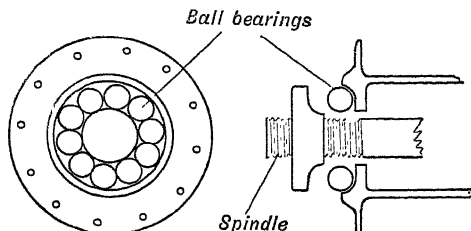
End view and section (with spindle drawn out) of one end of the hub of the front wheel of a bicycle, showing position of ball-bearings.
